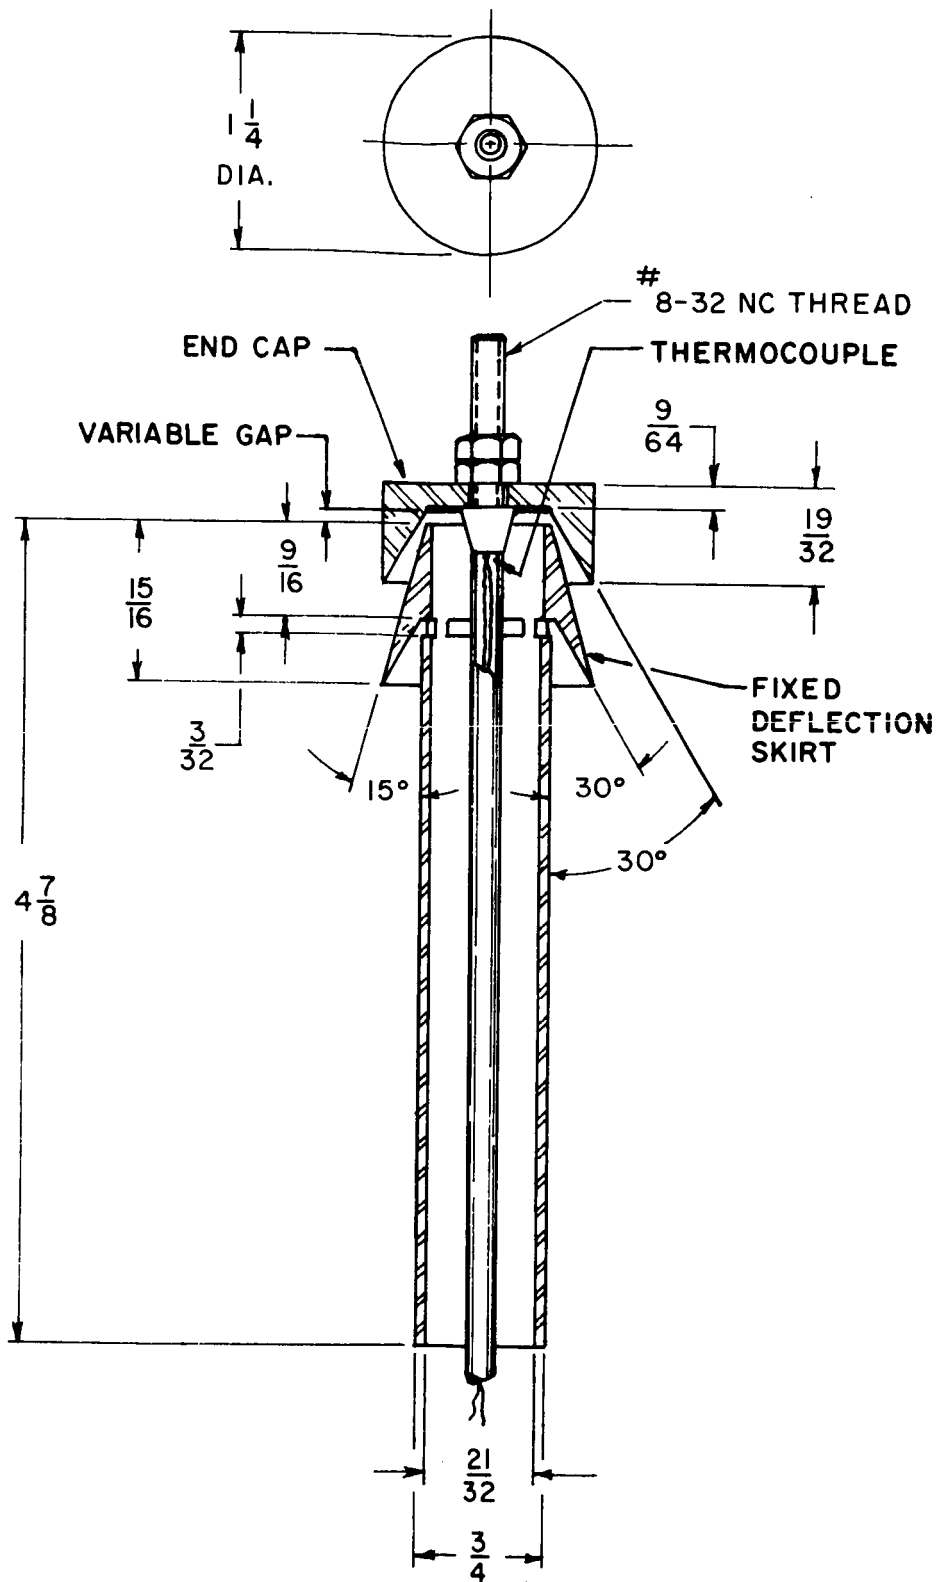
Schematic Diagram of a Dual Expansion Nozzle Assembly. An umbrella jet can be formed or eliminated by opening or closing the gap between the main assembly and the adjustable end cap.
